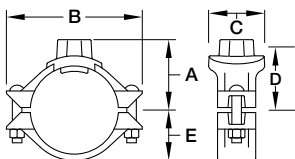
MECHANICAL TEE THREADED OUTLET
